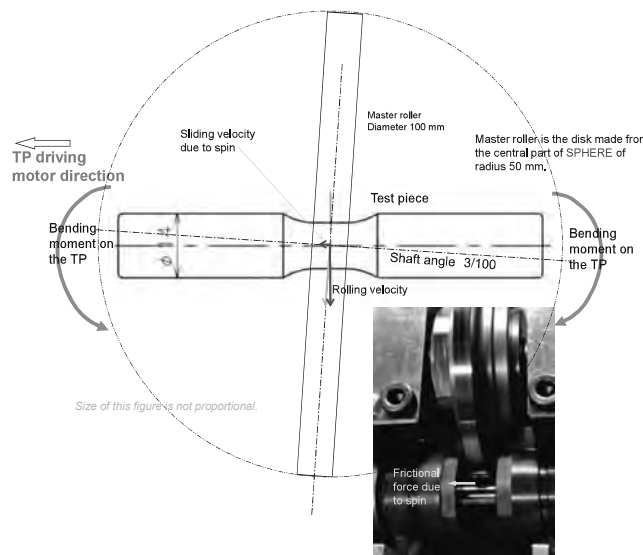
Skew setting of shafts to produce axial frictional force on TP
